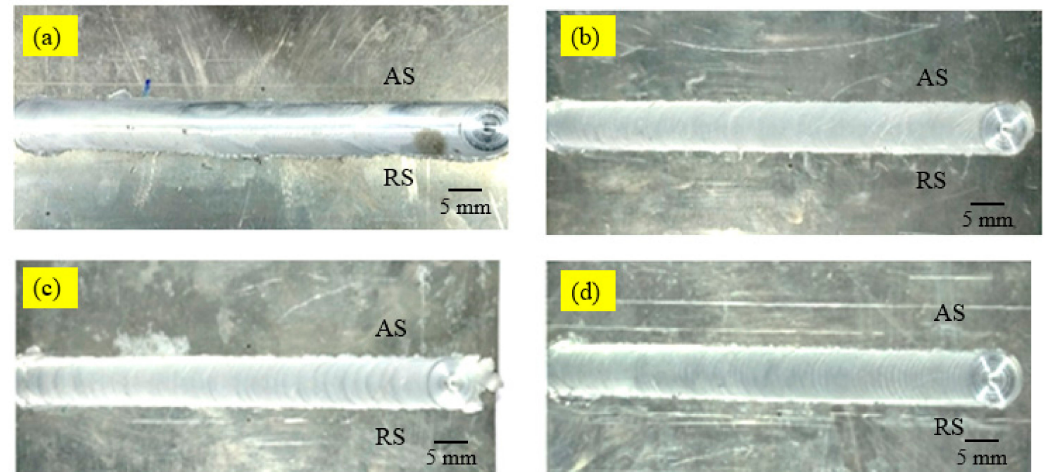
Surface morphologies of the welded joints: (a) IA, (b) WR, (c) WC, (d) WH.
